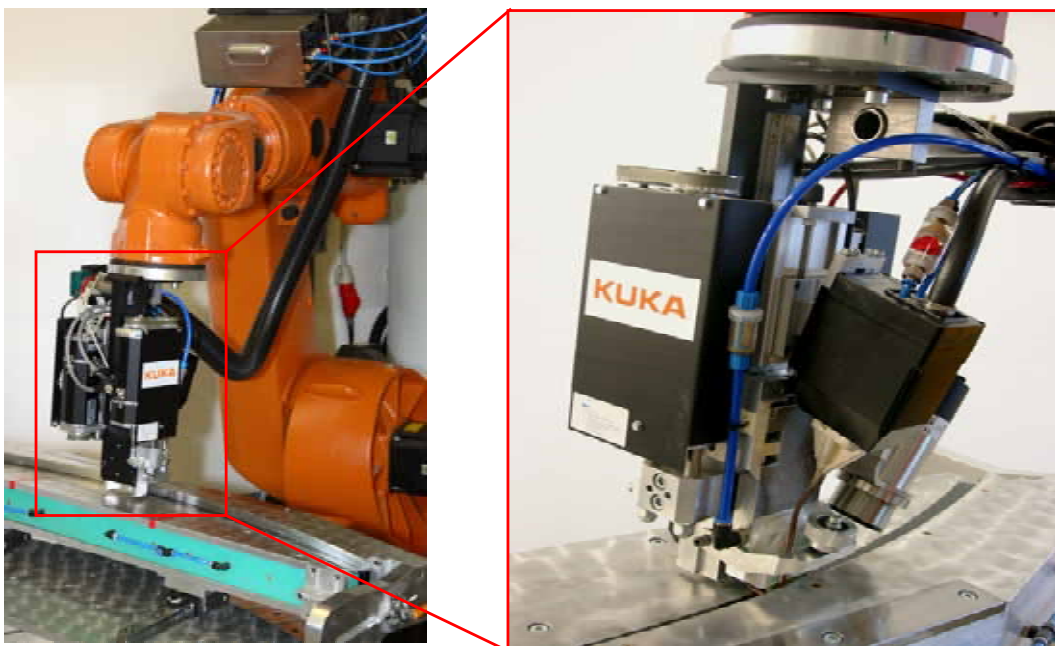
Induction welding robot at the Institut für Verbundwerkstoffe
